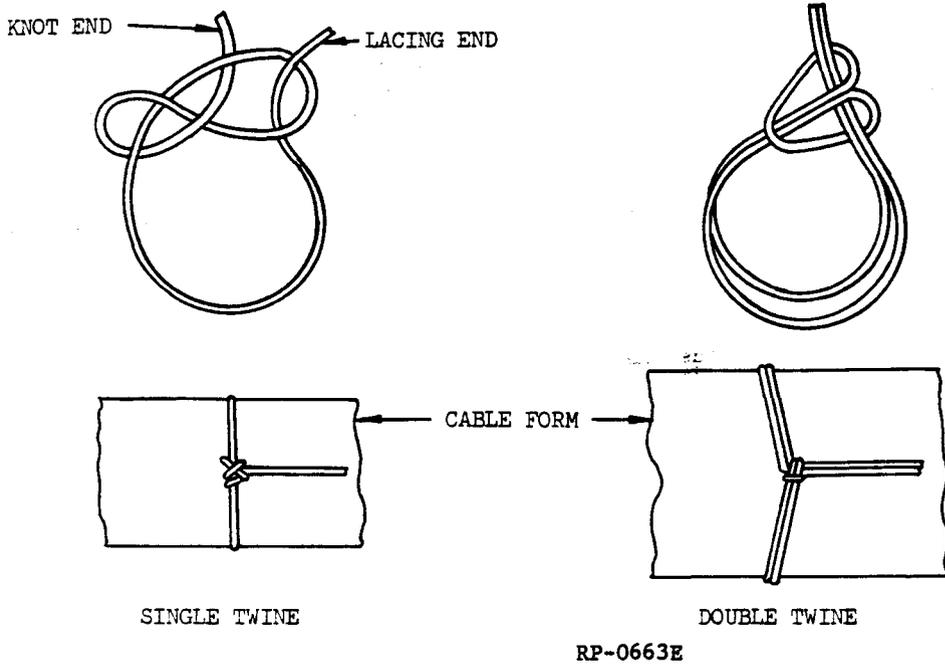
STARTING STITCHES FOR CABLE FORMS
